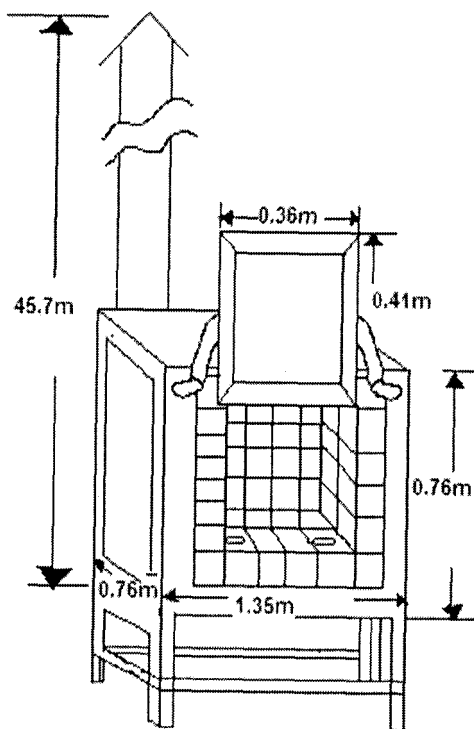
Tech Ceram Gas boy incinerator with technical dimensions
